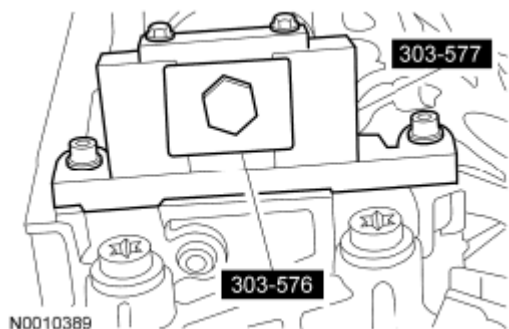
Identifying Camshaft Holding Tool And Adapter For 303-577
